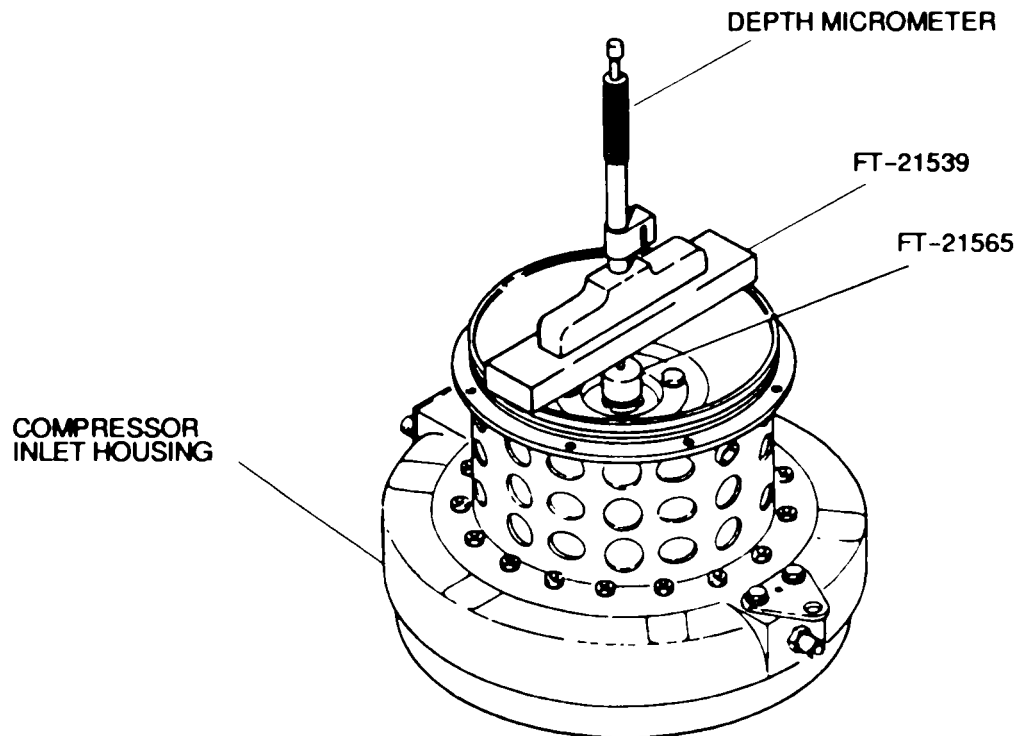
Obtaining Reading for Turbine Wheel Shaft Stretch for Final Assembly Using Fabricated Tools FT-21539 and FT-21565
